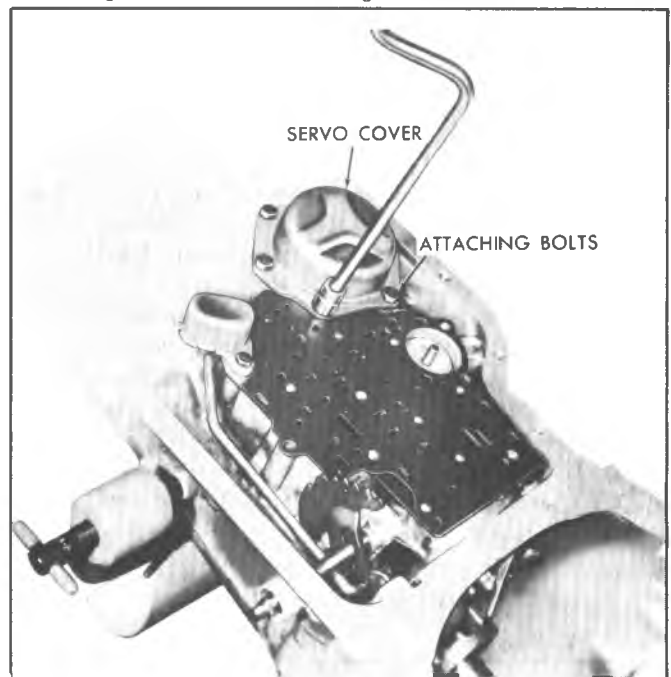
A-13C--Removing Rear Servo Cover Attaching Bolts
